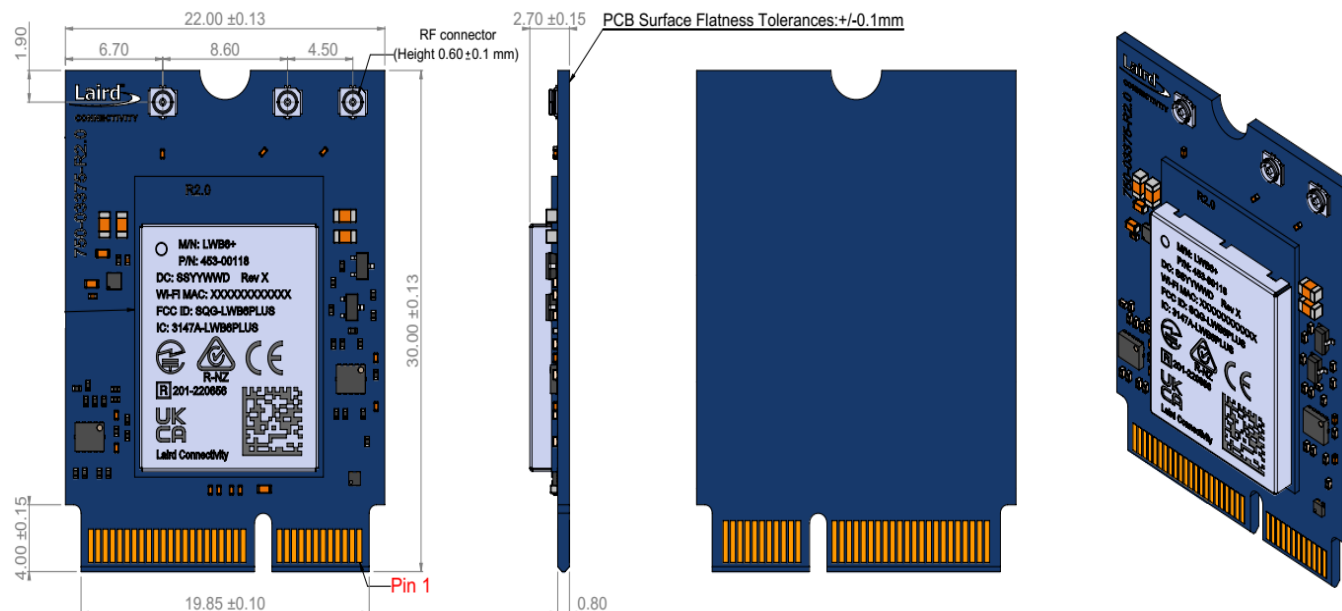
Mechanical Drawing – M.2 2230 module with External Antenna Connector (-SC)
